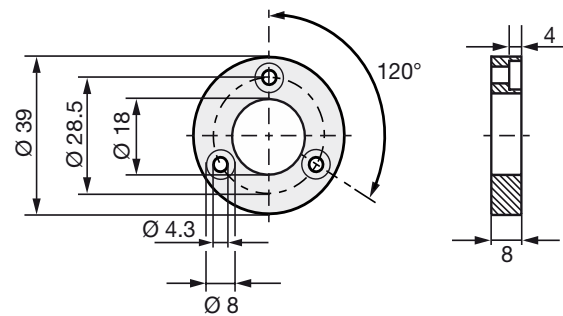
Magnet BTL-P-1018-3R for high-pressure operation
